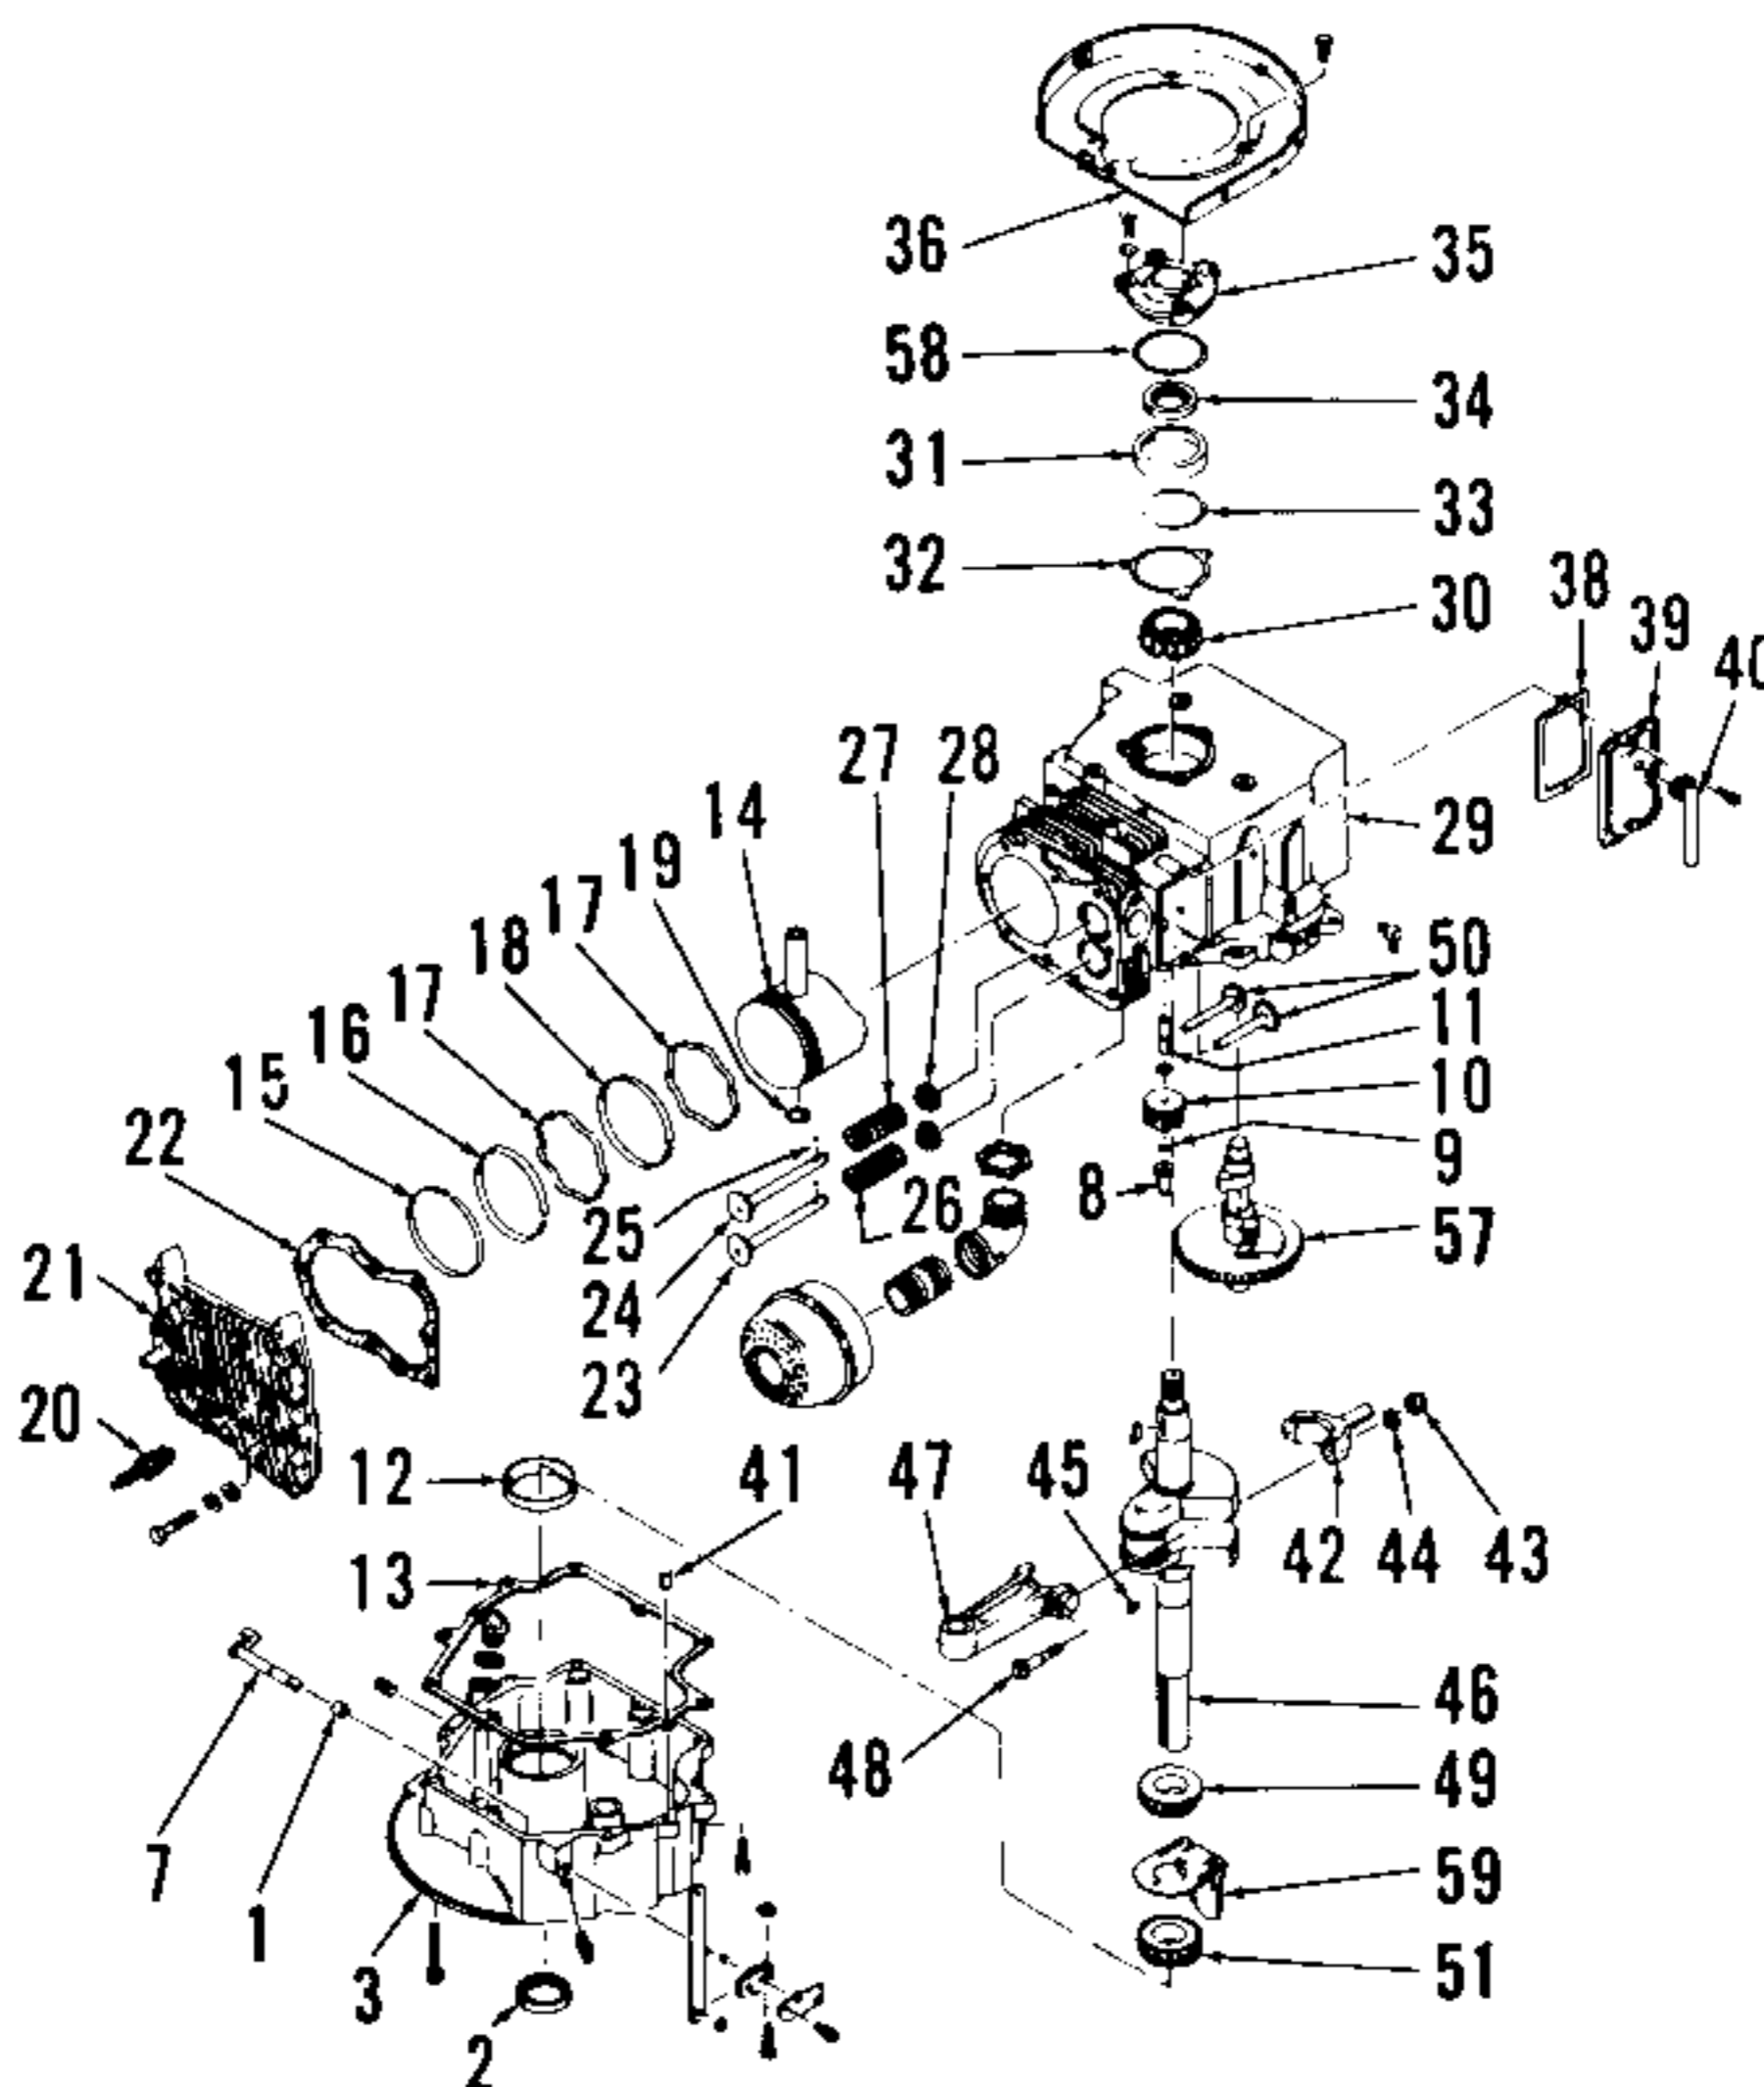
Exploded view of Model VH80 or VH100 vertical crankshaft engine.
